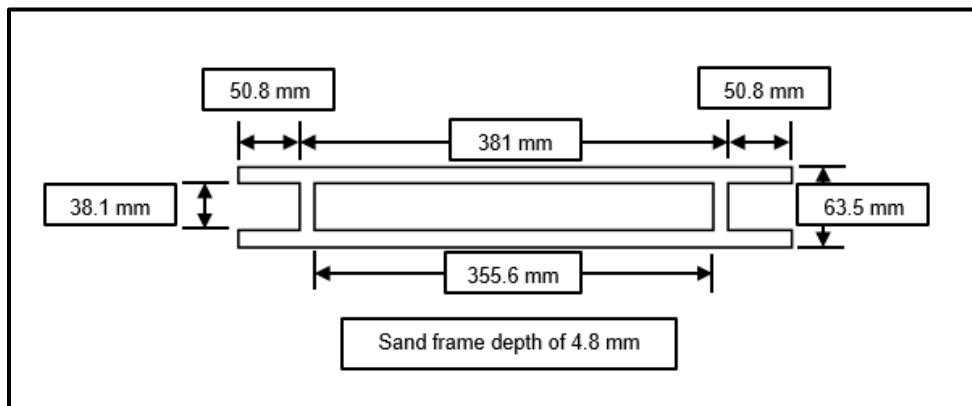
Side View of Sand Frame with Weather Stripping Applied
